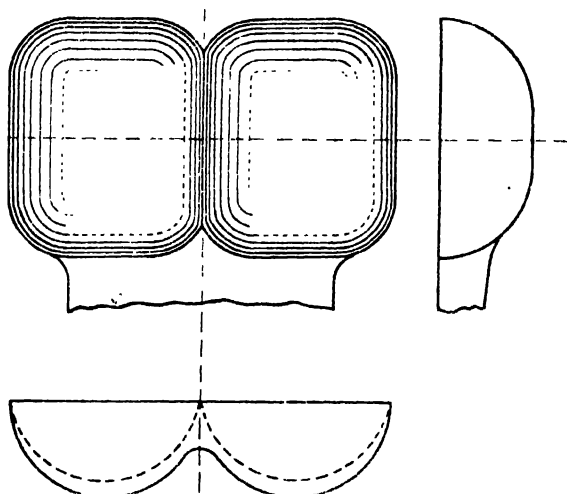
PELTON WHEEL BUCKETS (EXTERNAL VIEWS)
